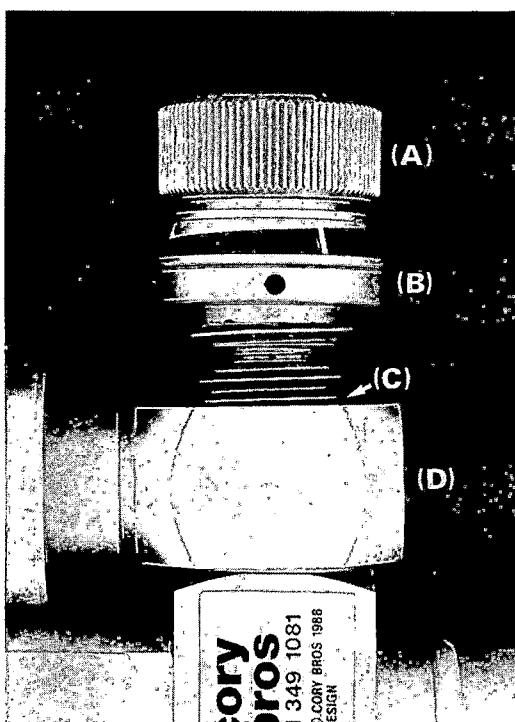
Lock nut threads are not in contact and off-line with valve control threads.
